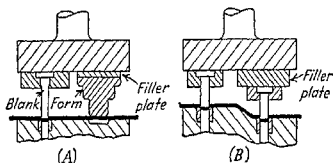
Use of filler plates: (A) Filler plate and blanking punch both have same amount ground off at each sharpening; (B) filler plate used to avoid too long a blanking punch at right.
